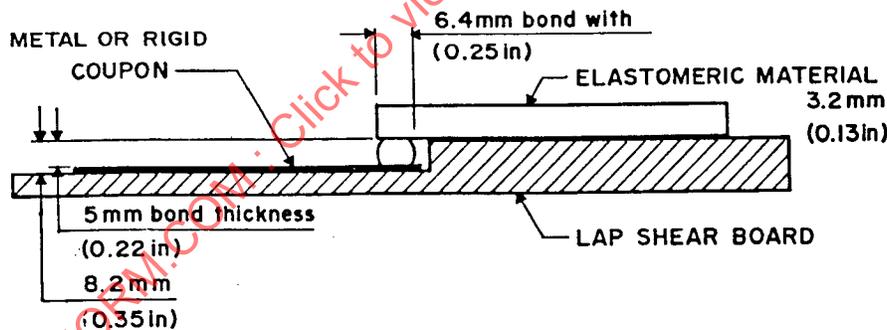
SIDE VIEW OF OVERLAP SHEAR SPECIMEN
